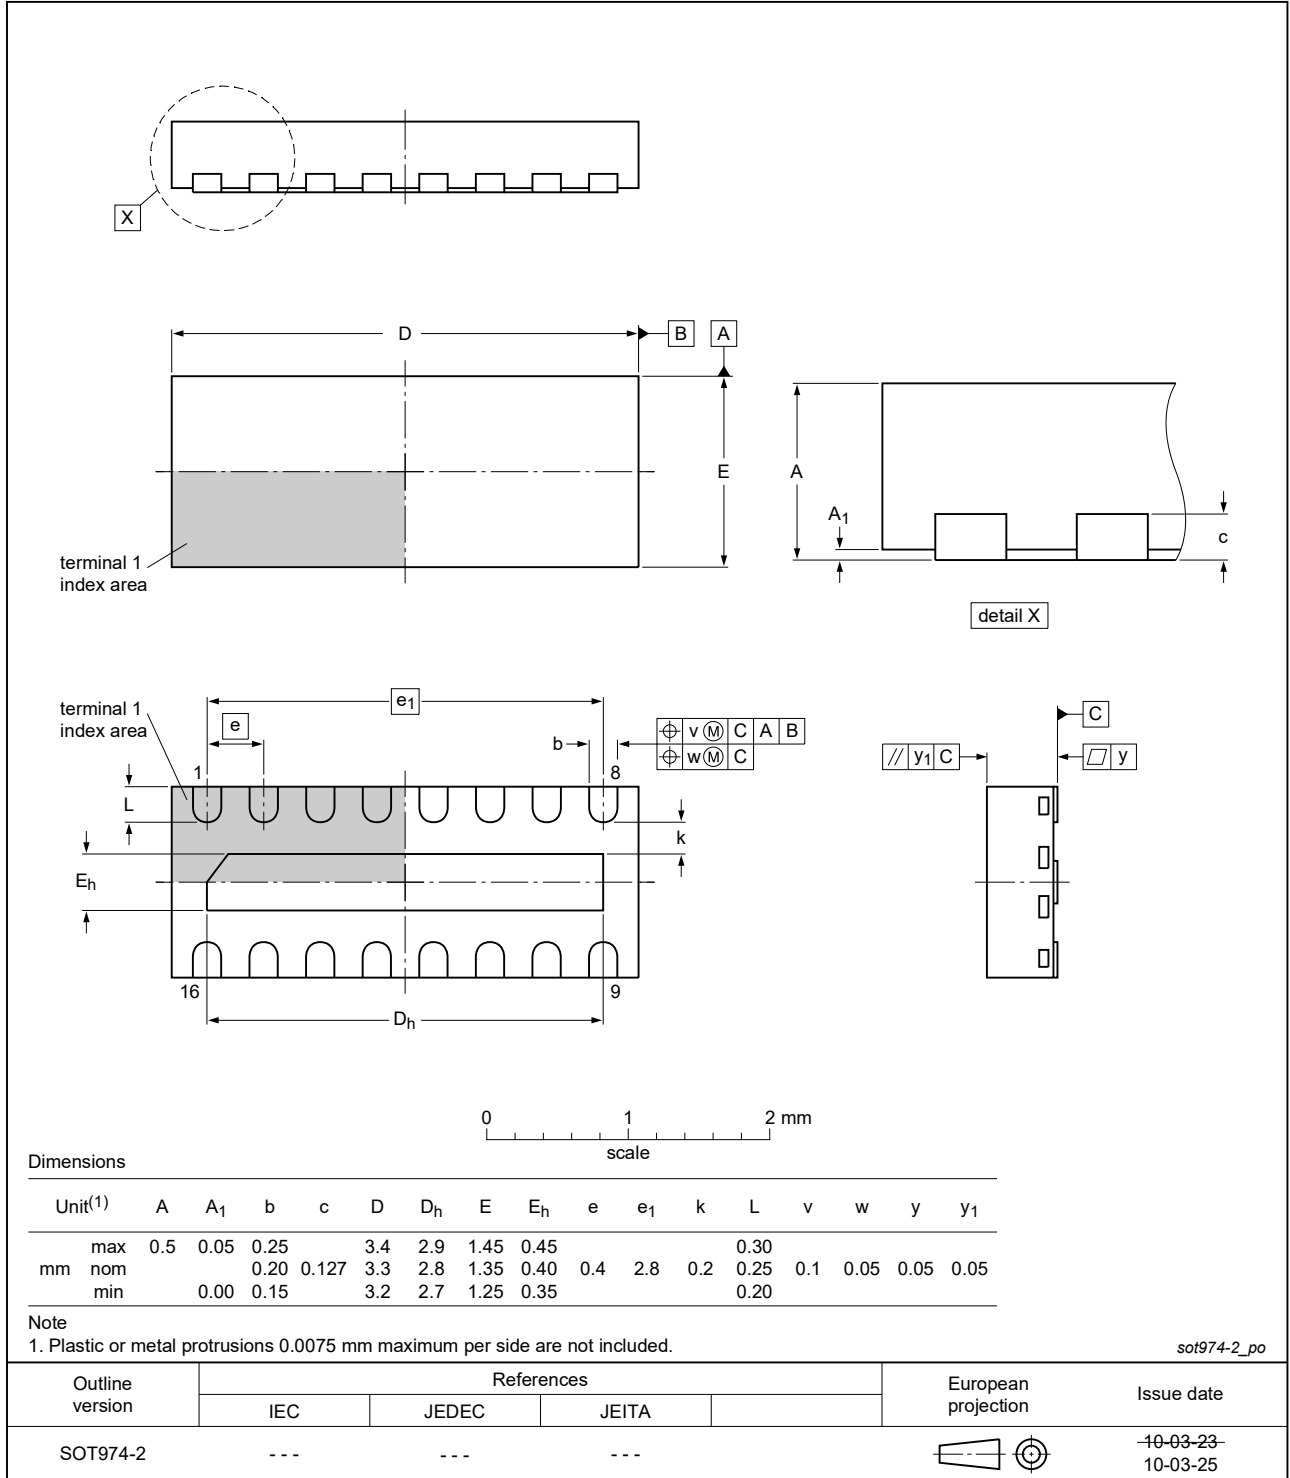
Package outline DFN3314-16 (SOT974-2)
